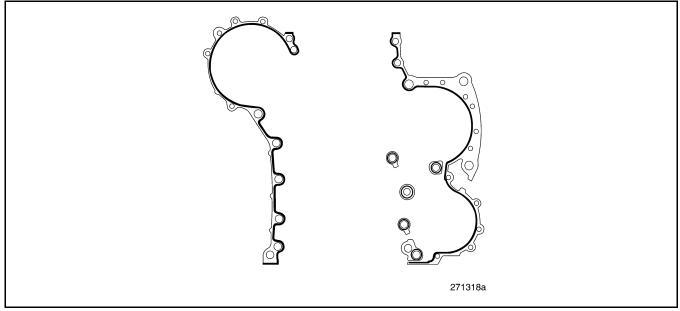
Sealant Application Pattern — Flywheel Housing to Plate
